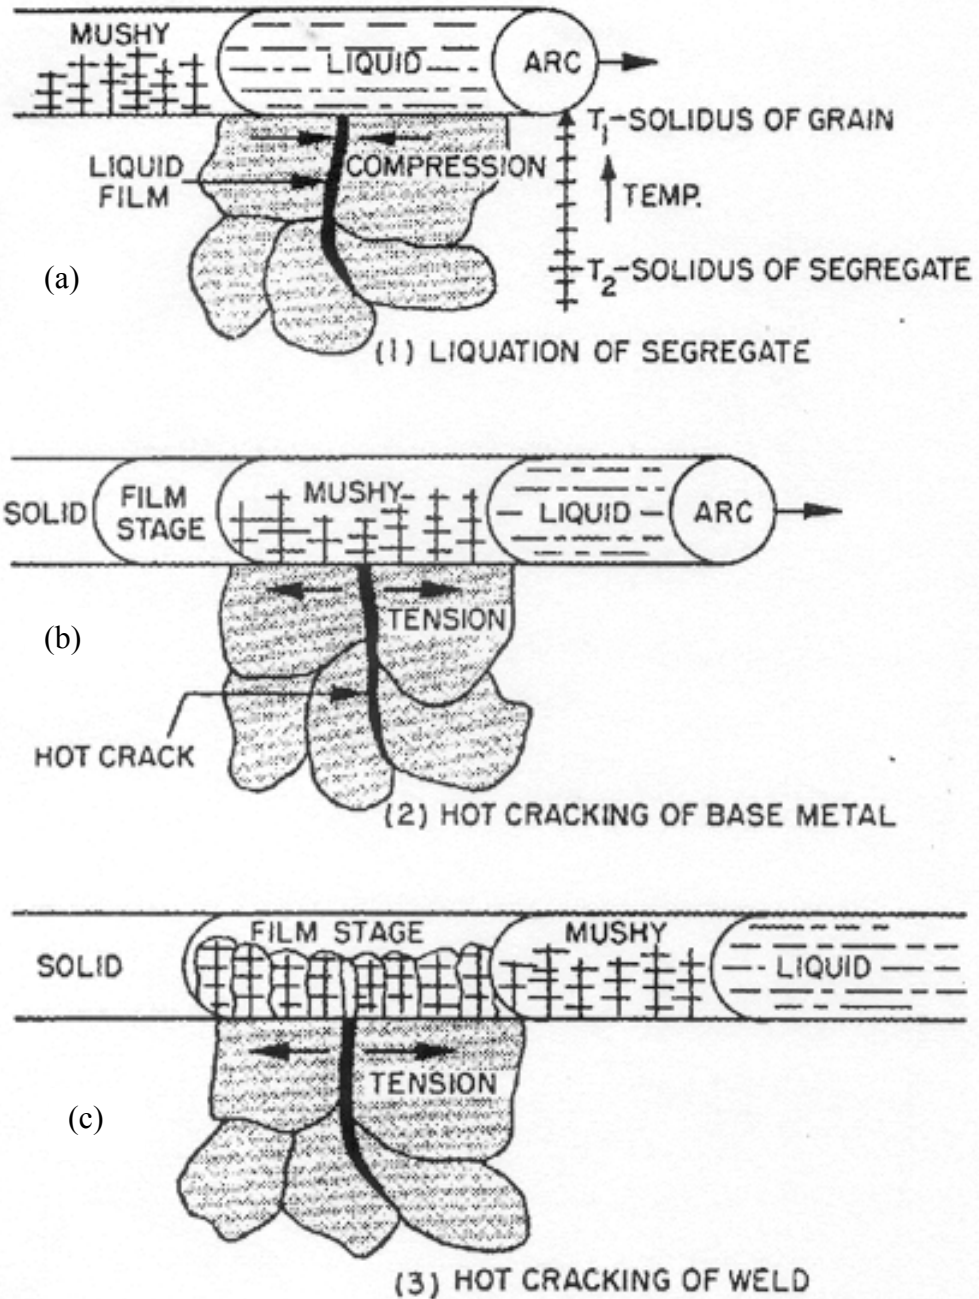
Schematic illustration of weld hot cracking processes a) liquation of segregate, b) hot cracking of base metal c) hot cracking of weld [51].
